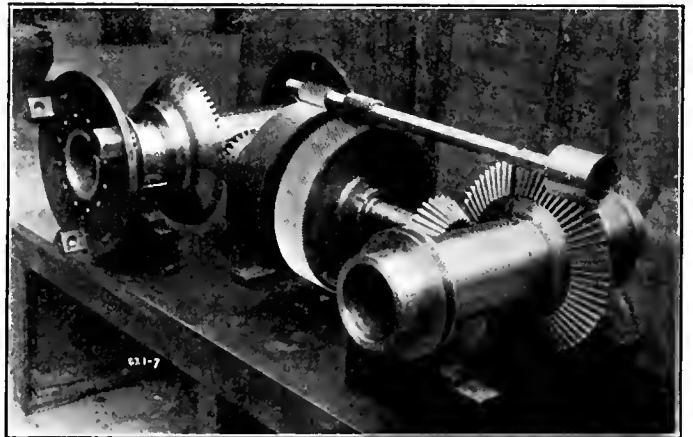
Double Reduction Gearing With Quill-Drive Hollow Shafts
